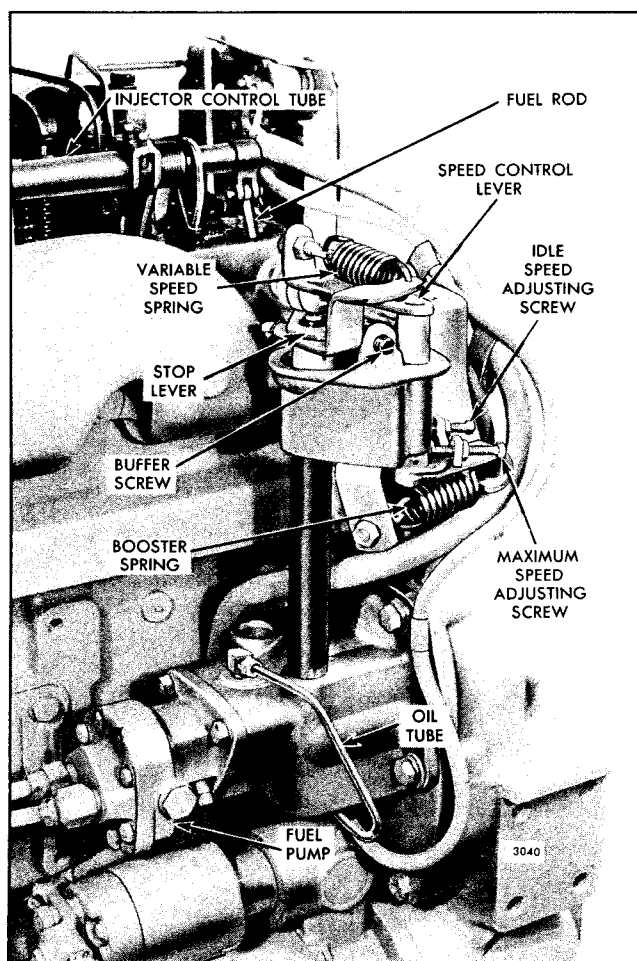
Variable Speed Open Linkage Governor Mounted on Engine
